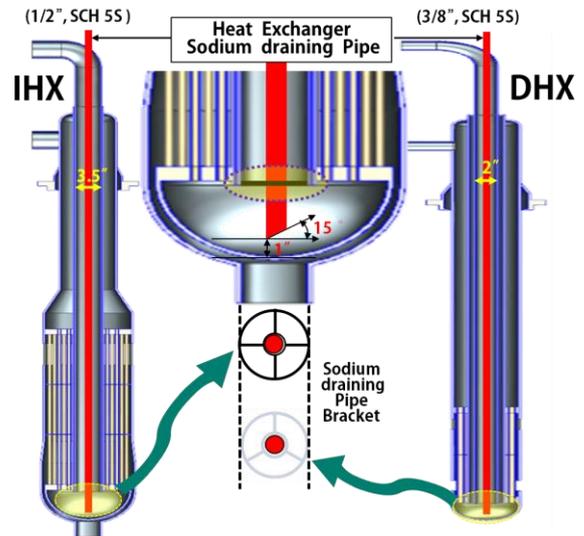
The concept of installation of Heat exchanger sodium draining pipe
